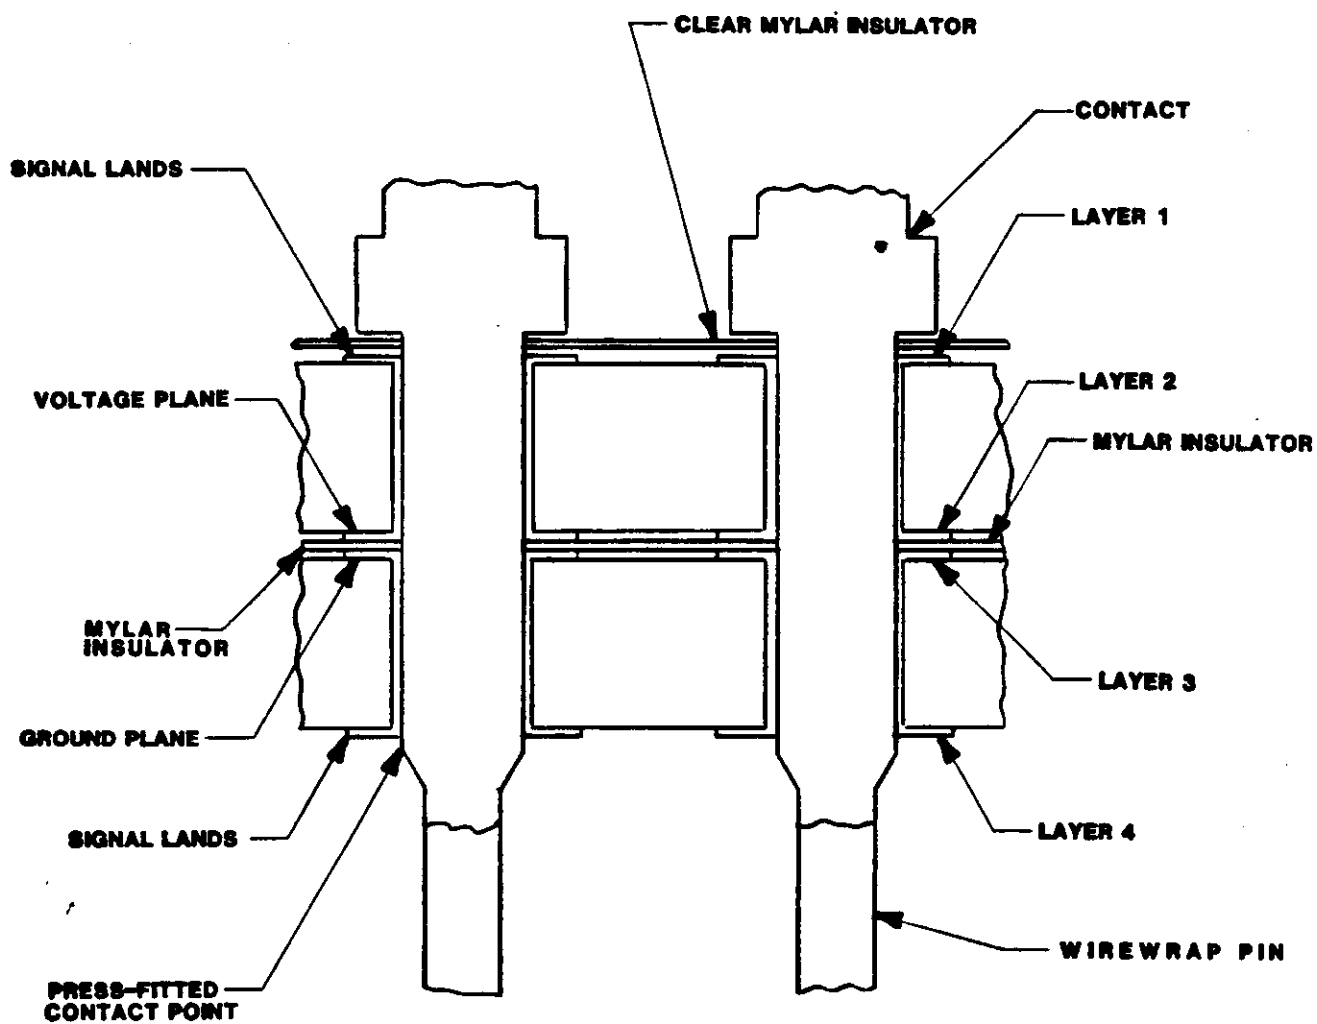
Typical Multilayer Backplane/PCB Cross-Sectional Area View
